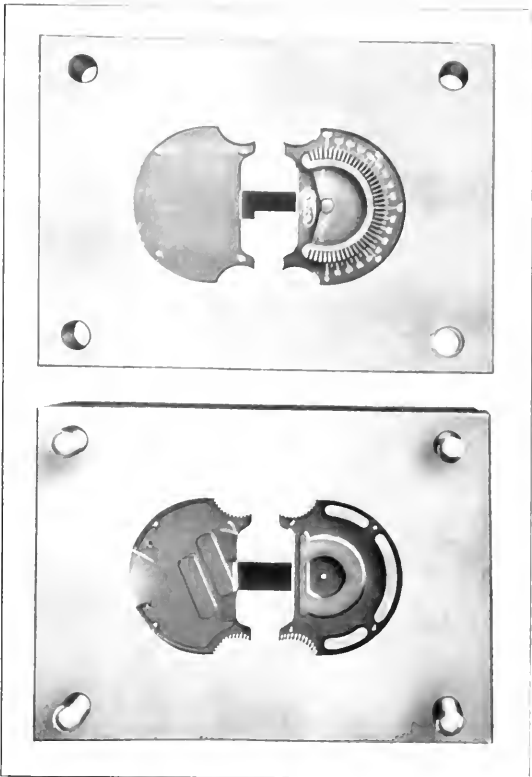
Die-casting Mold-halves for "Stoco" Inclnometer
